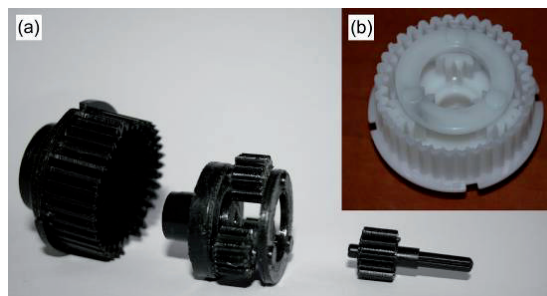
Planetary gear: a – prototype, b – mass-produce.
